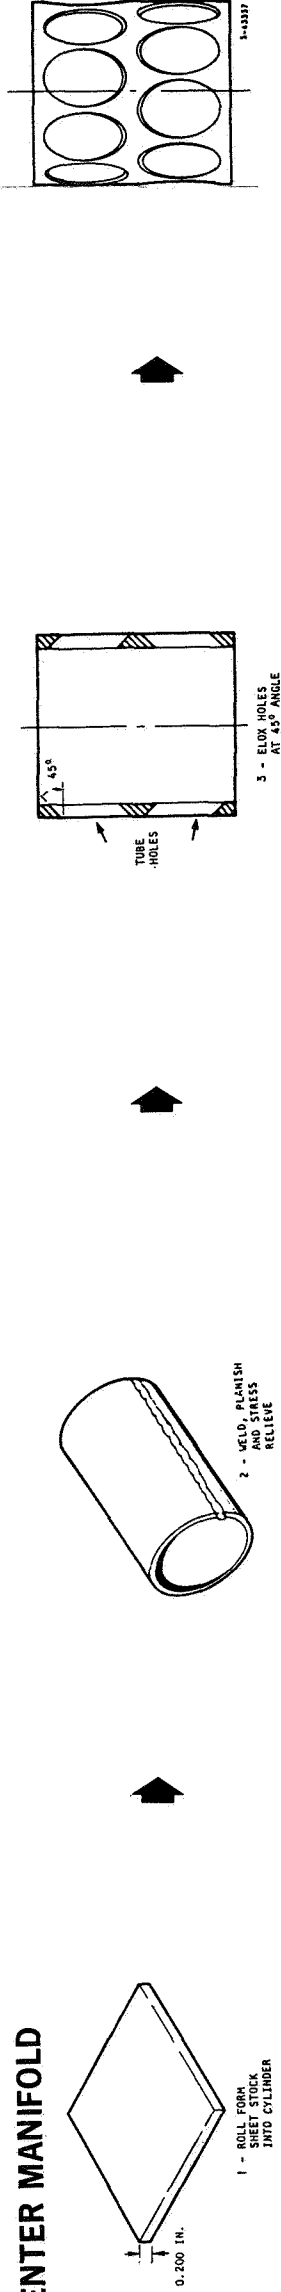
TYPICAL FABRICATION AND ASSEMBLY SEQUENCE
